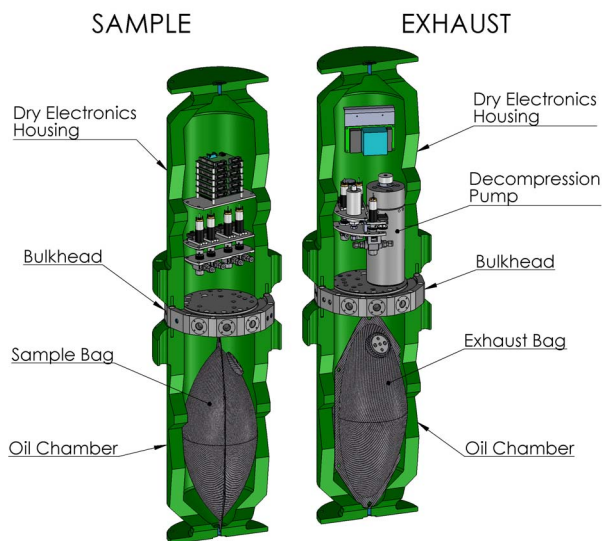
Cutaway view of the DWSM tower architecture, showing pressure chambers, bulkhead plates, and major components.
